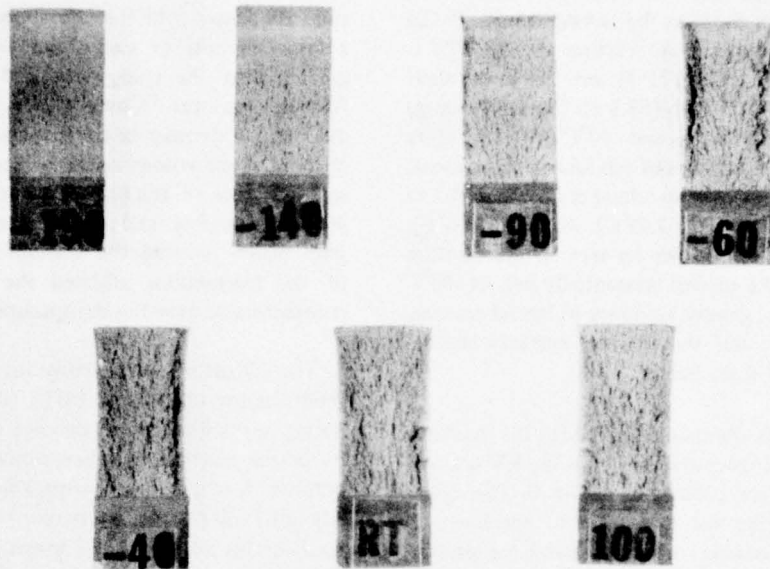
Fracture surfaces of machine-notched base plate specimens tested at the temperatures indicated ($^{\circ}\text{C}$); WR orientation. (Note the large amount of lateral contraction for specimens tested above -40°C [-40°F].)
